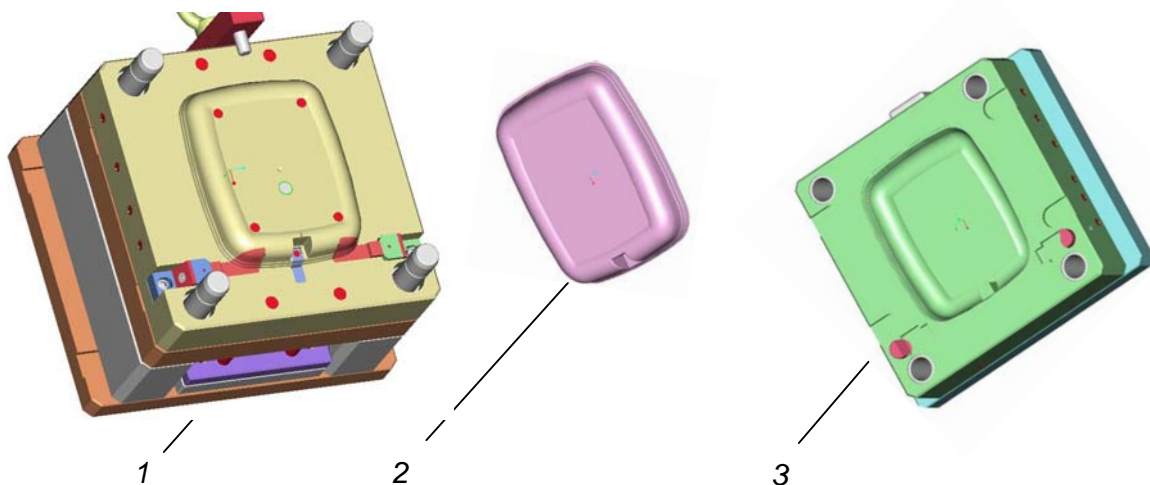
Experimental injecting mold 1-Mobile semi mold, 2-piece; 3 fixed semi mold
